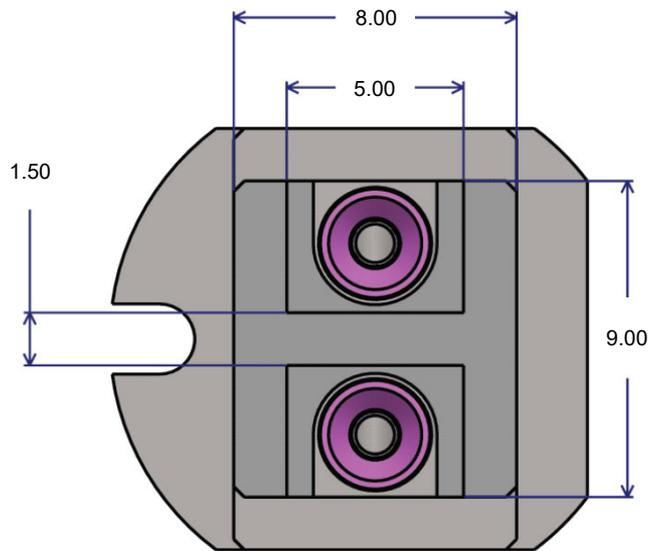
Suggested Power Tower Pickup Tool – Bottom View
